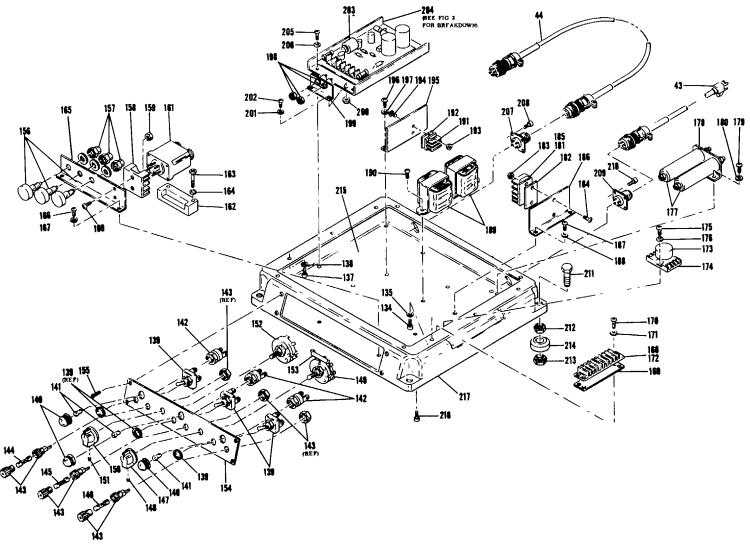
Gyro Tester, Indicator Assembly (Sheet 3 of 3)
